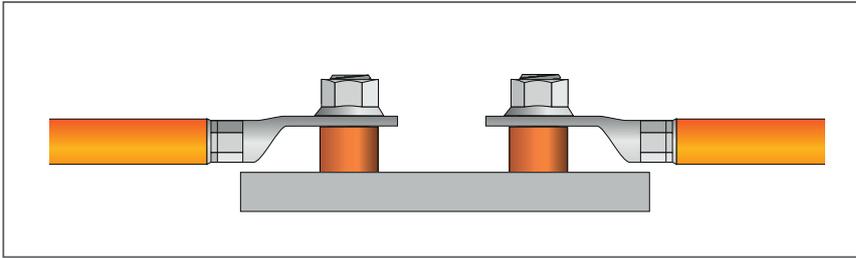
HV BM 1.2, mounting the ring terminals on the copper bar side
